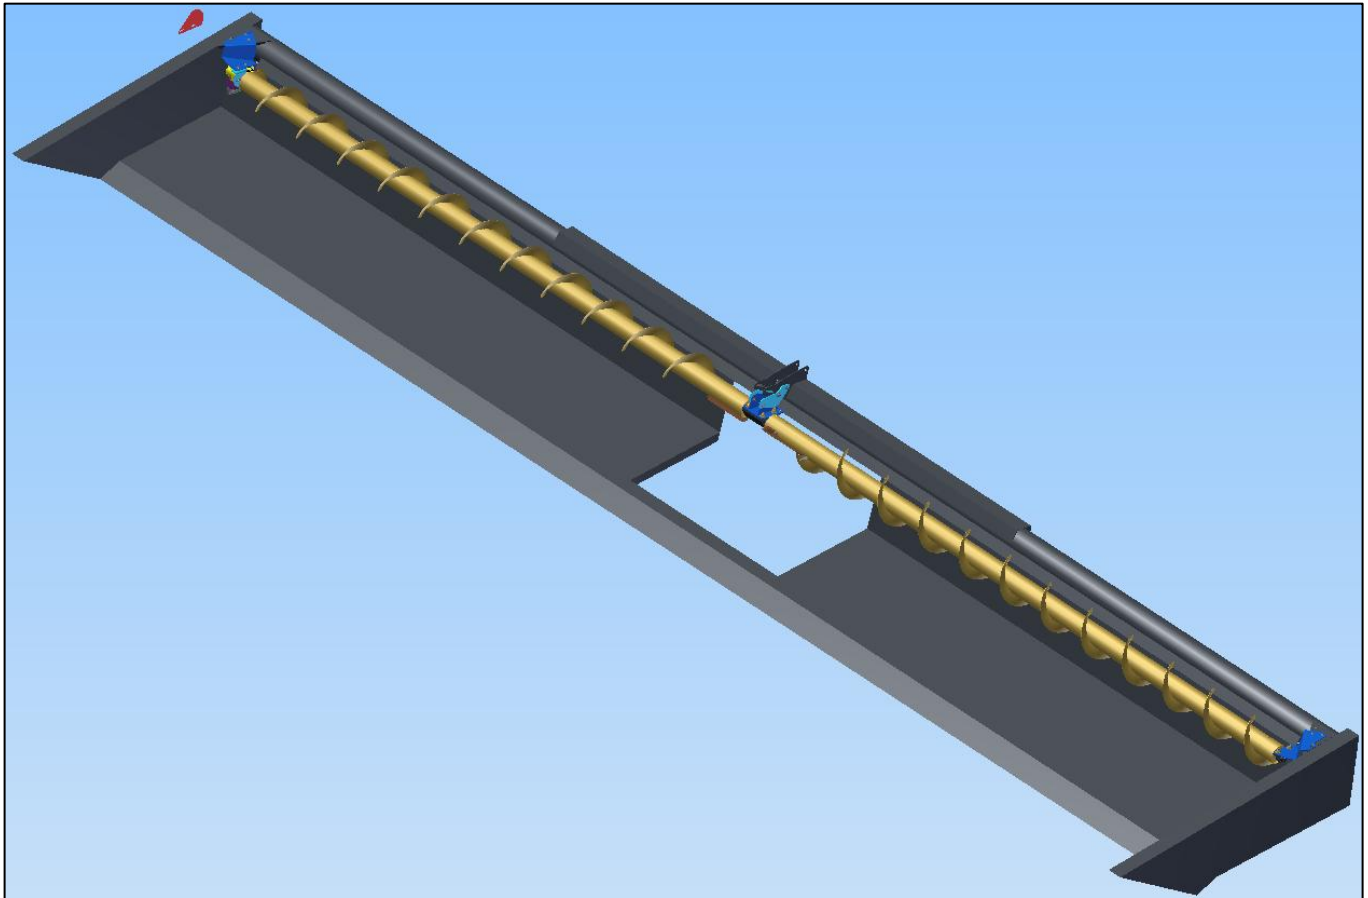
COMPLETE HEADER- 36 FT CASE 1042, KIT# 405826- BOLT ON MOUNTS
